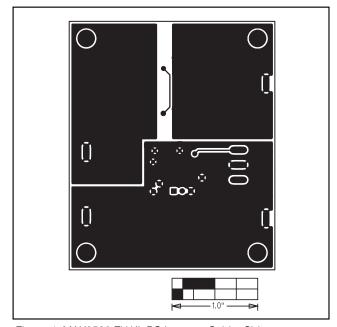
MAX8536 EV Kit PC Layout—Solder Side
